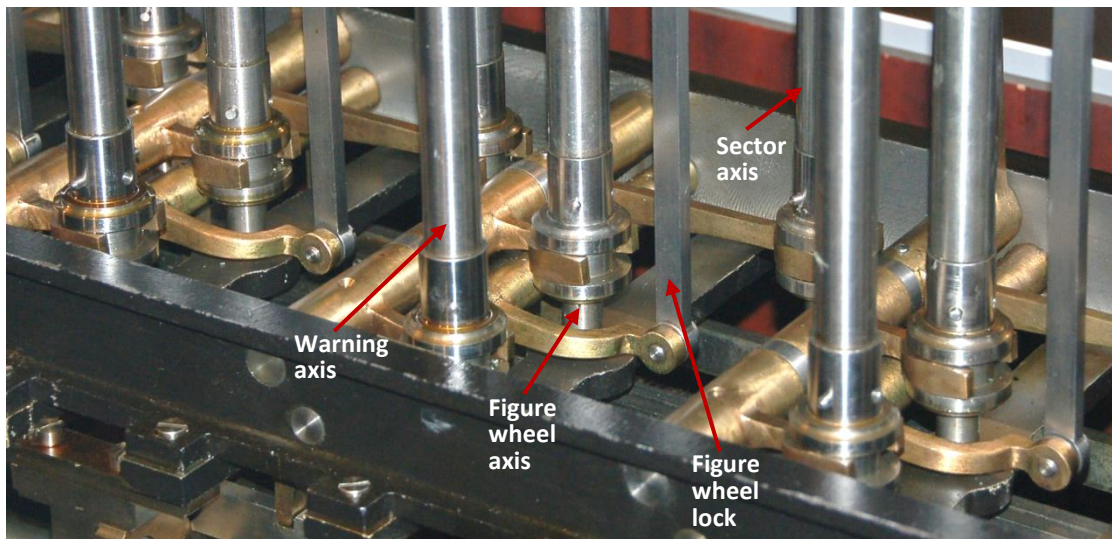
Bell cranks for locks, sector, figure wheel, and warning axes (view from rear of Engine).
